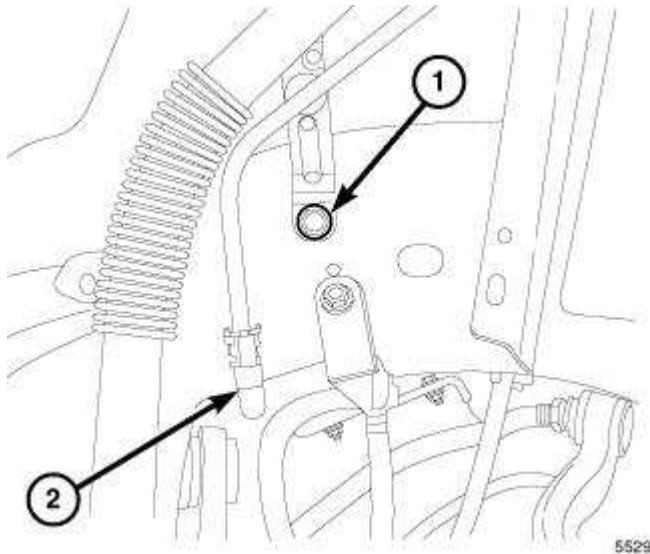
Filler Tube Vent Line And Mounting Bolt
